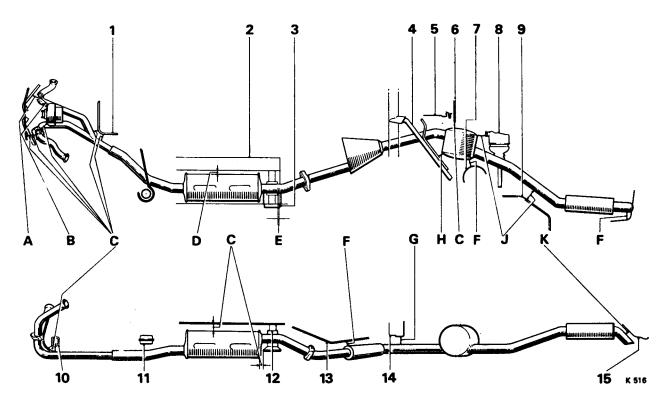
EXHAUST SYSTEM ALIGNMENT
